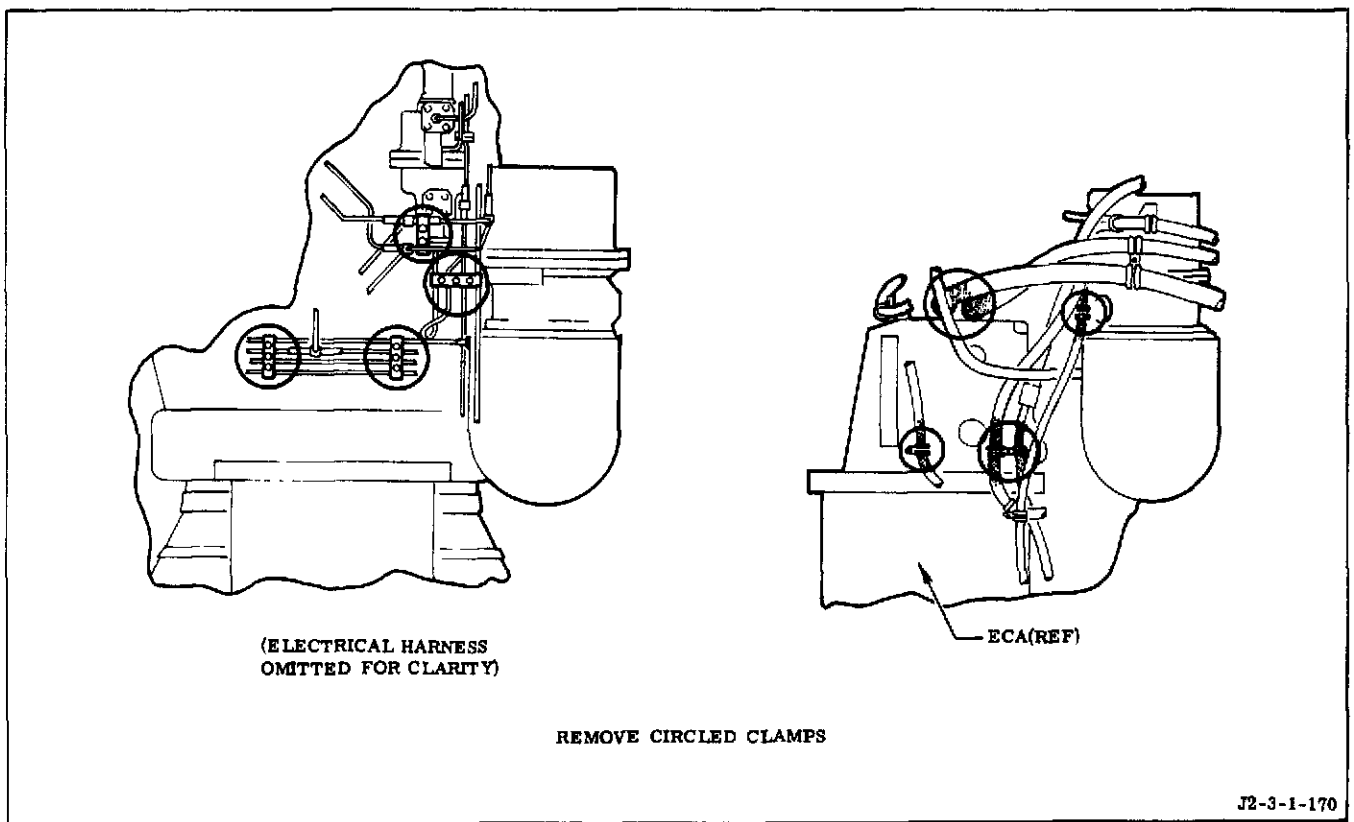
Clamps Requiring Removal for MOV Filter Housing Assembly Removal
